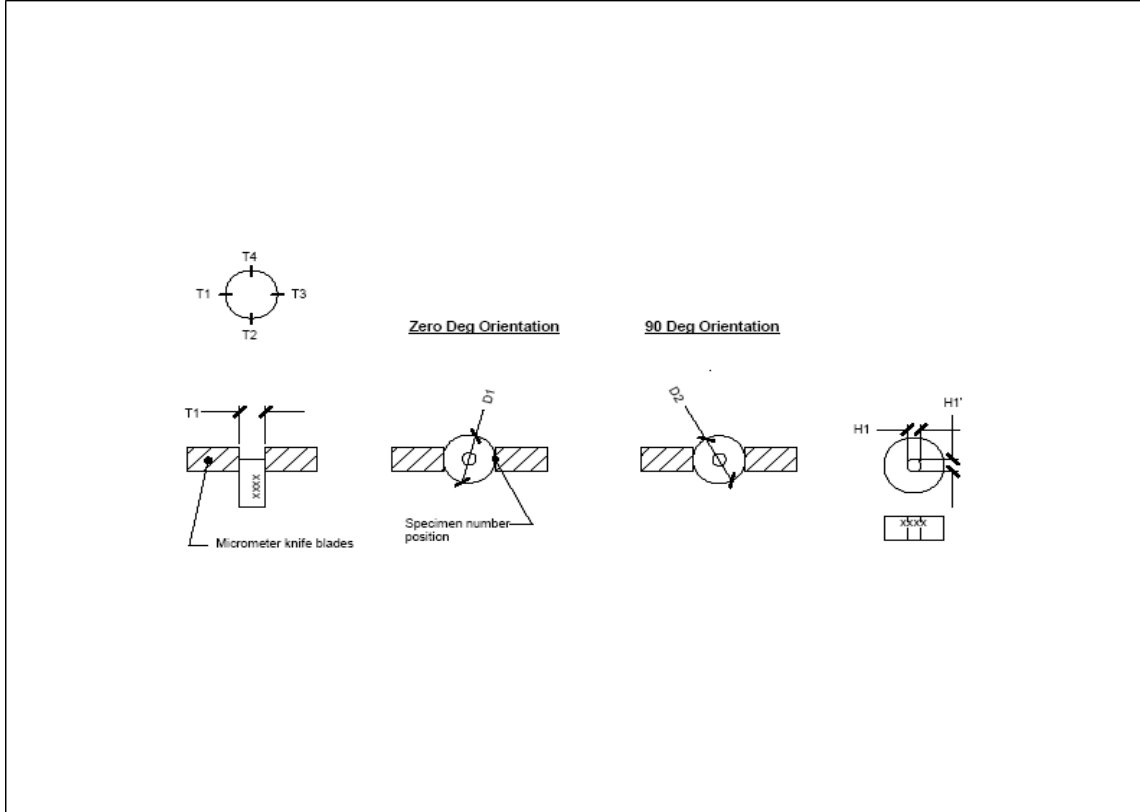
Measurement locations used for HTV specimen dimensional PIE
